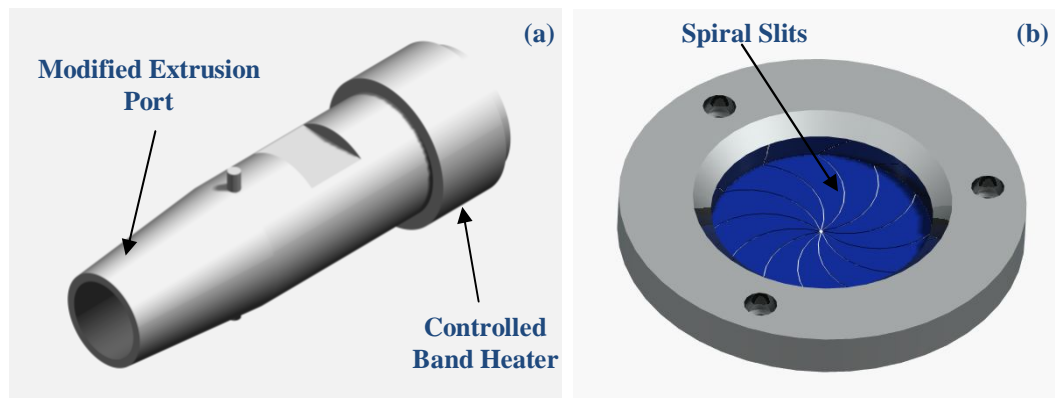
Modified nozzle and pizza valve for EADFRM
